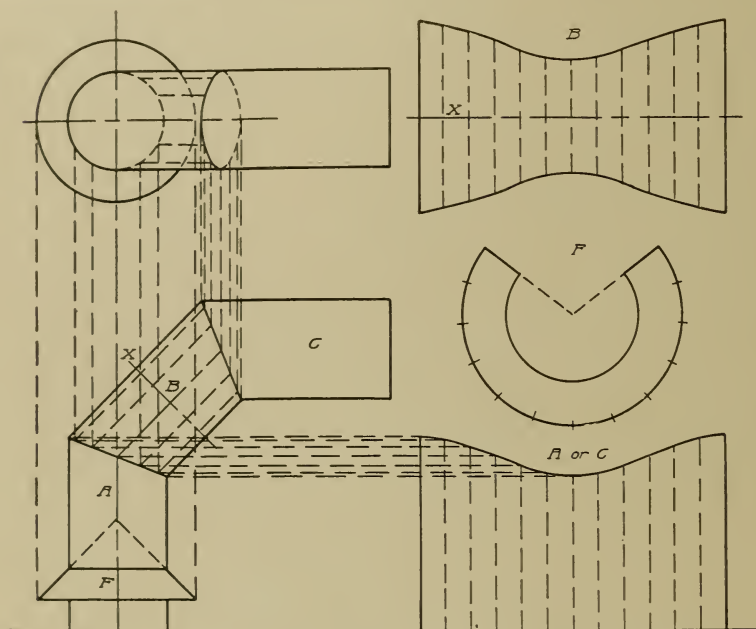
Plan, Elevation, and Development of Three-Piece Elbow and Collar
